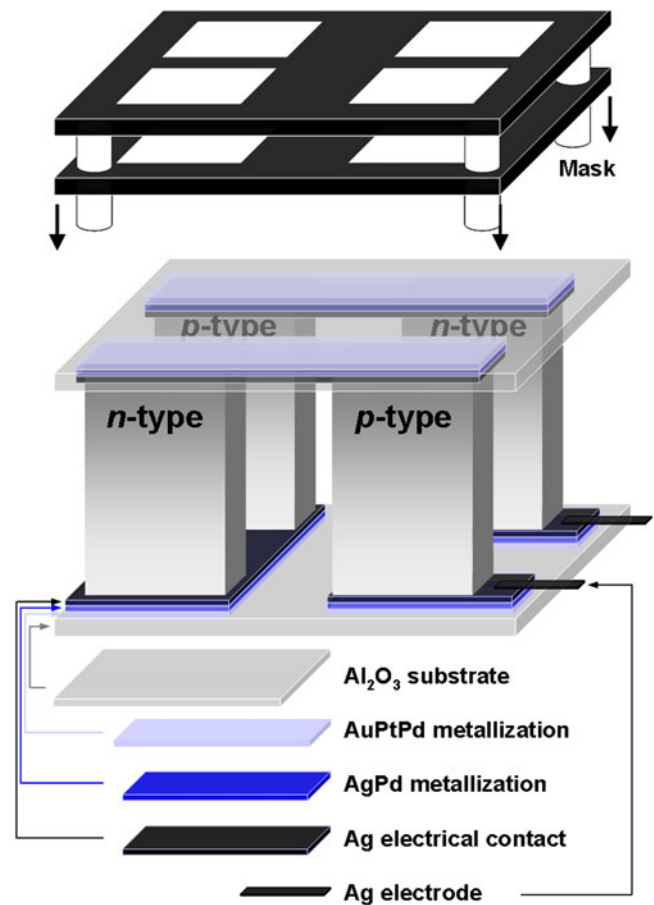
Assembly drawing of a thermoelectric oxide module.
